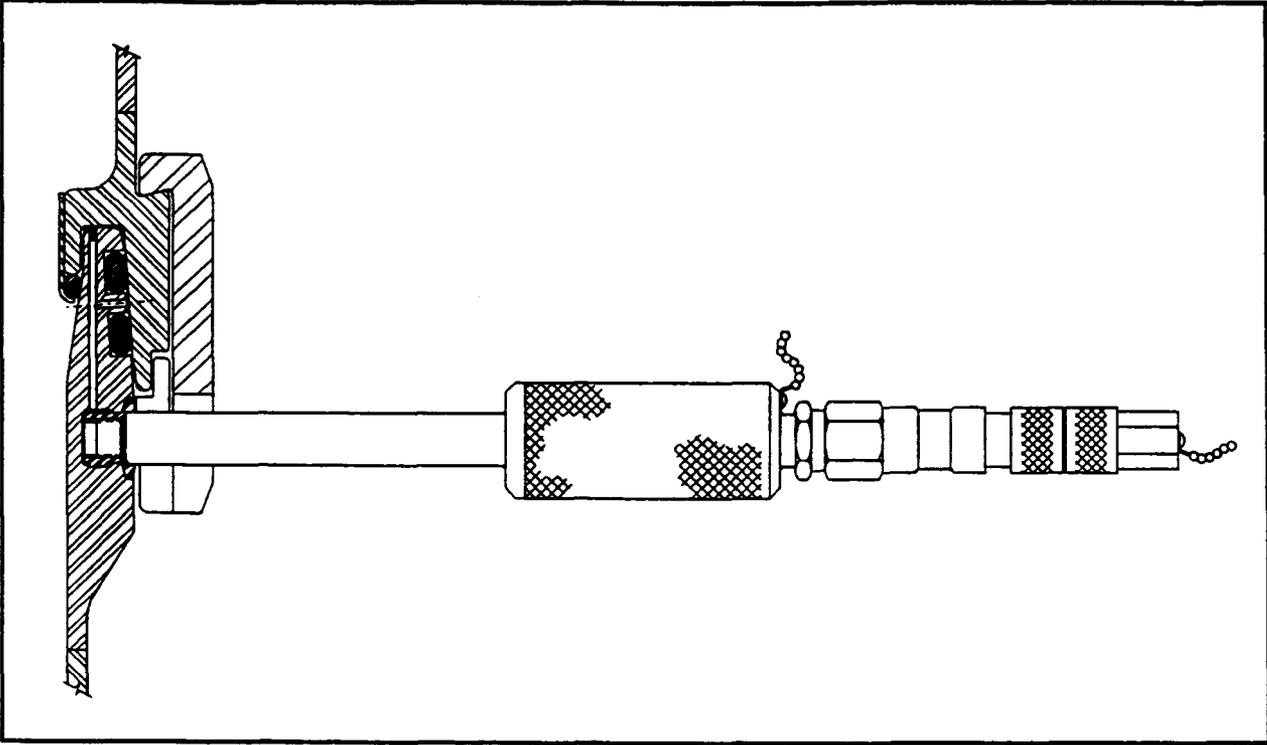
ICV Seal Leak Check Tool (2077-093-A1)
